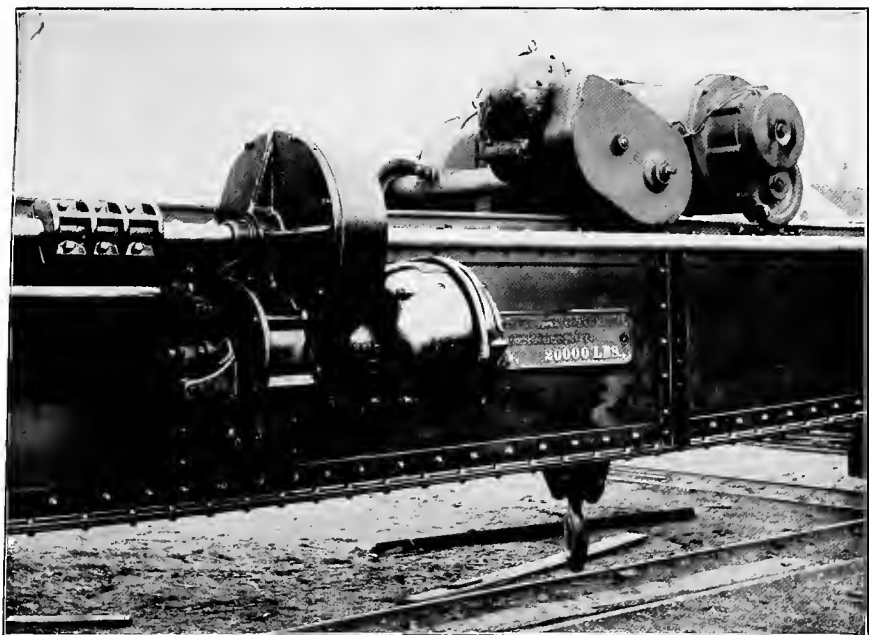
ANOTHER CRANE, SHOWING WHAT CAN BE DONE IN PROTECTING GEARS
